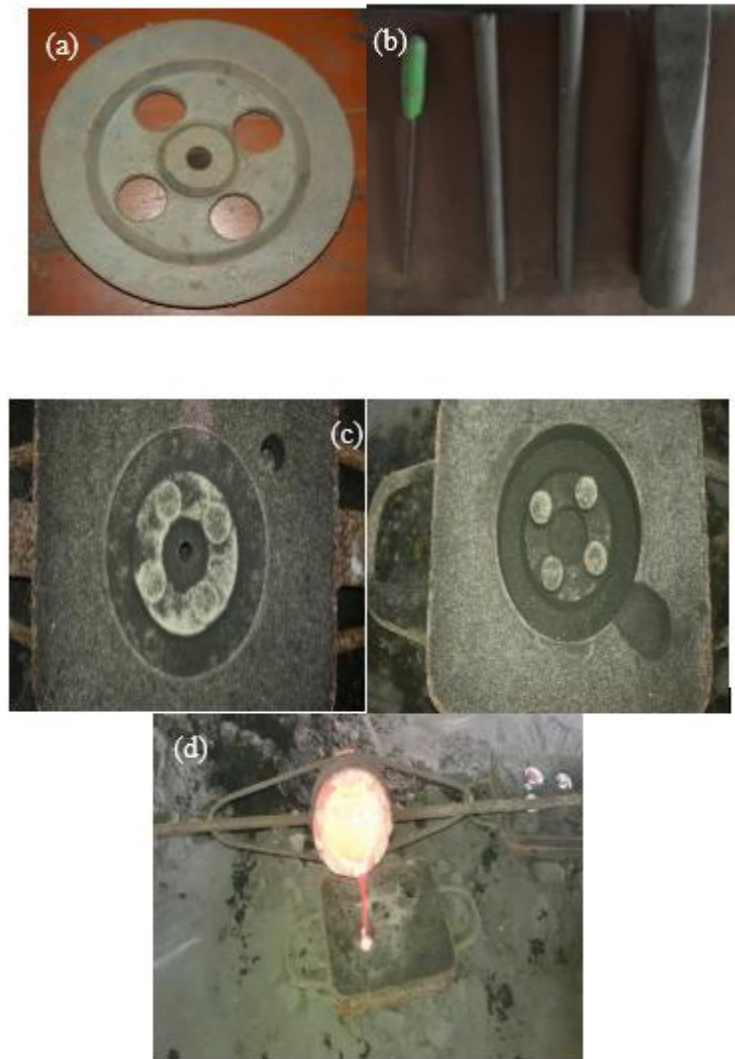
(a) wooden pattern; (b) casting tools; (c) mold box (cope and drag) preparation with cavity and (d) pouring molten aluminum into mold cavity
